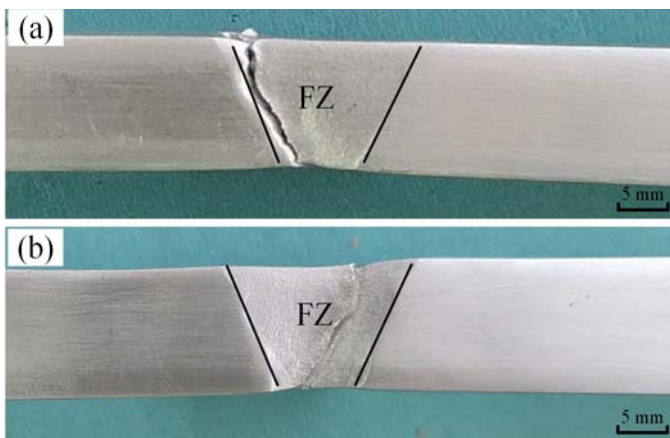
Fracture locations: (a) at FZ edge and (b) near FZ center
